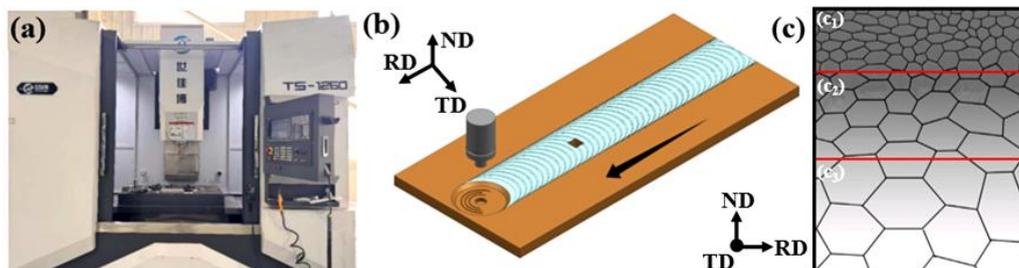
Schematic diagrams of FSP processing and sampling: (a) TS-1260 friction stir welding machine; (b) schematic of FSP process; (c) sampling locations, where (c1), (c2), and (c3) denote the fine-grained zone, transition zone, and base material zone, respectively.
